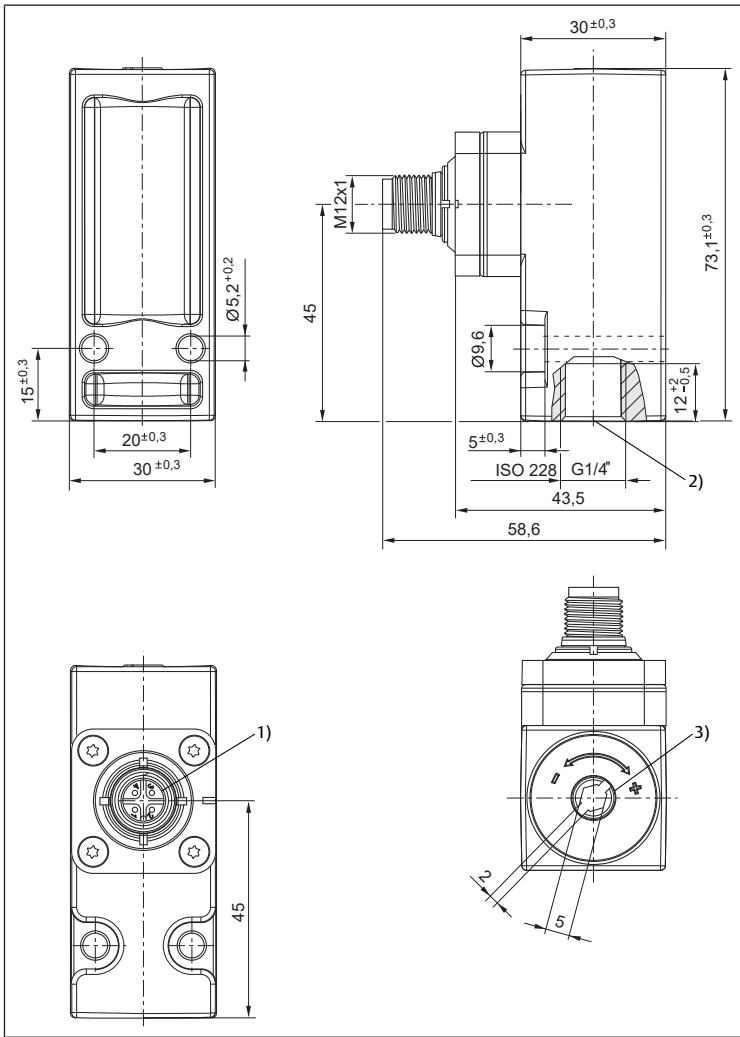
M12x1, pneumatic connection, internal thread G1/4
